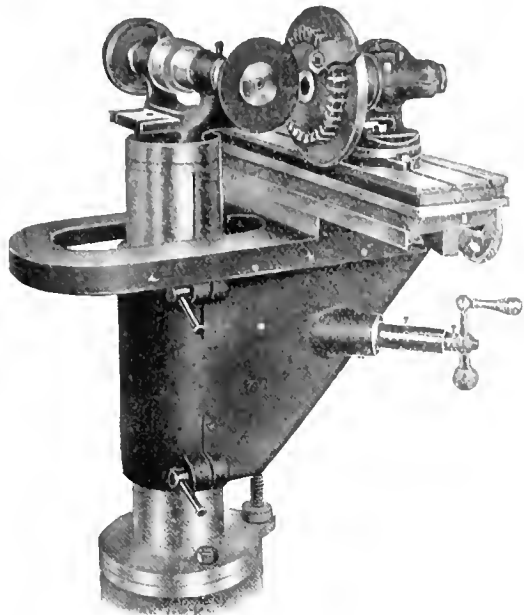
Grinding the Hub of a Cutter on the Face-plate.
